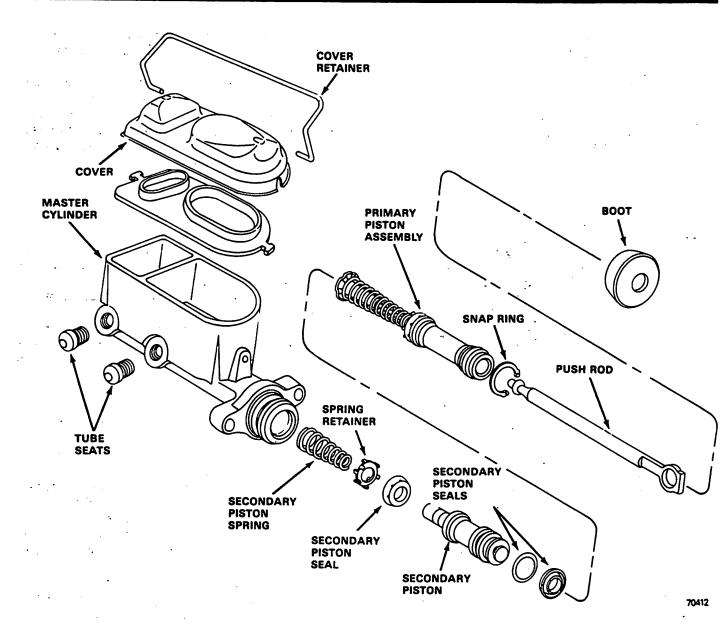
G-10 Master Cylinder-CJ and Scrambler Models
